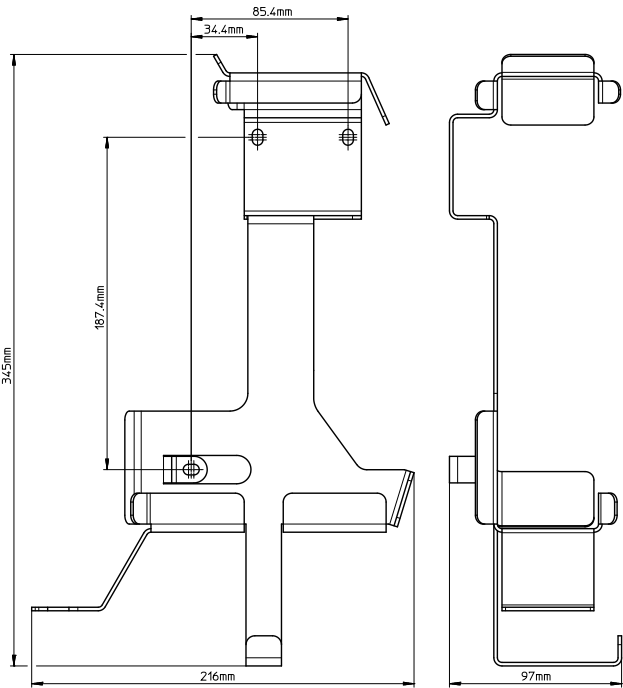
Front and side view of wall bracket CAFM-D4-W, (dimensions in mm)
